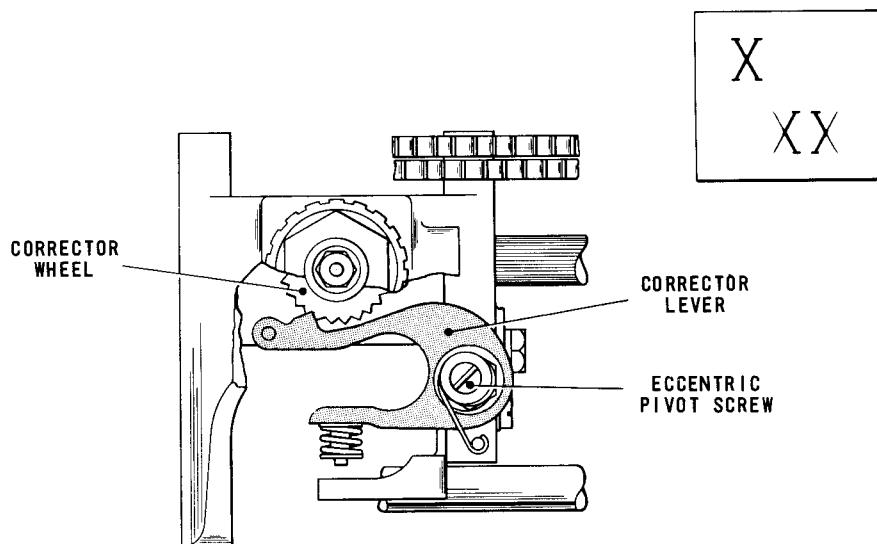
TYPEHEAD CORRECTOR MECHANISM
